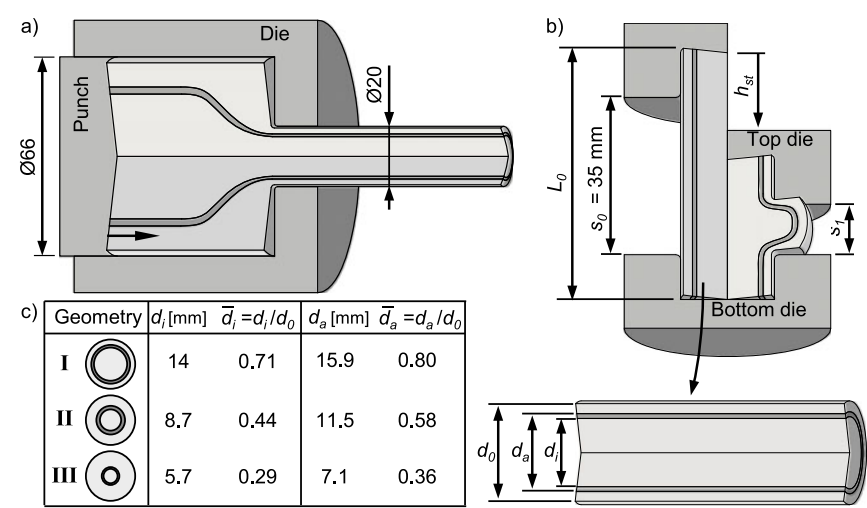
a Compound hot extrusion, b cold flange upsetting, c billet dimensions
